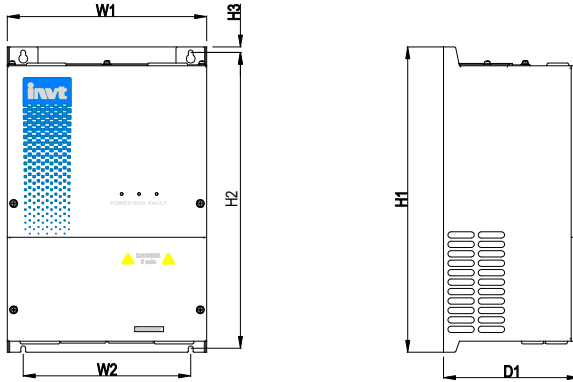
Wall installation diagram for 220V 7.5–18.5kW/380V 15–37kW
